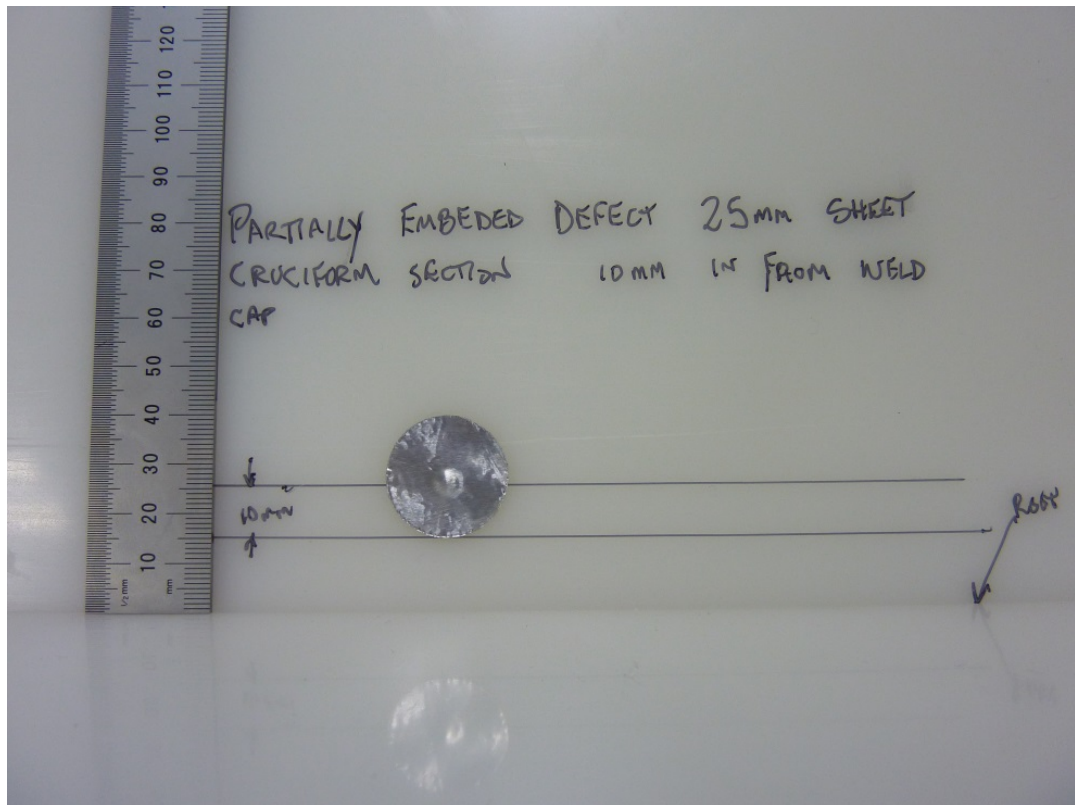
Aluminium disc placed on sheet so that it is embedded 10mm into extrusion weld.
